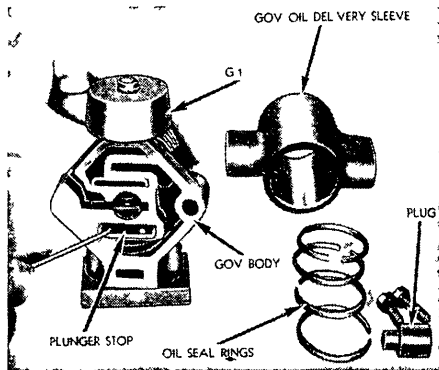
To disassemble governor and rear pump, pull sleeve off governor body. Mark edge of body and governor drive flange (if not previously marked) so they may be re-installed in original position if run-out is within .005. Then disassemble governor. Do not attempt to remove governor plungers or weights from either plunger assembly
